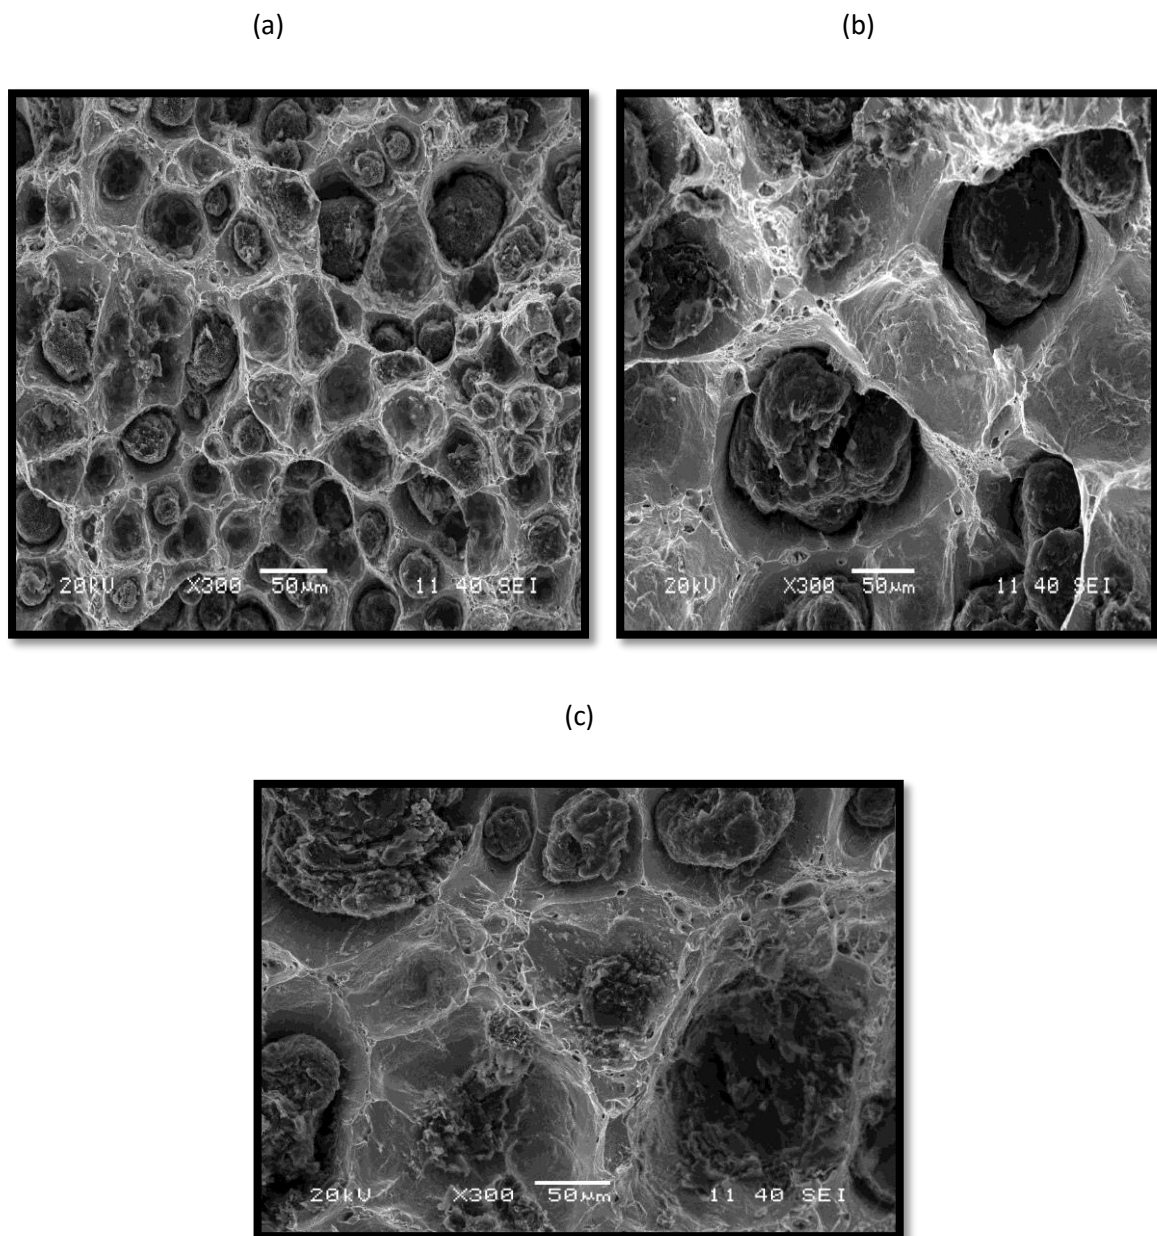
Fracture Surface of DMS ductile iron samples after impact testing.
